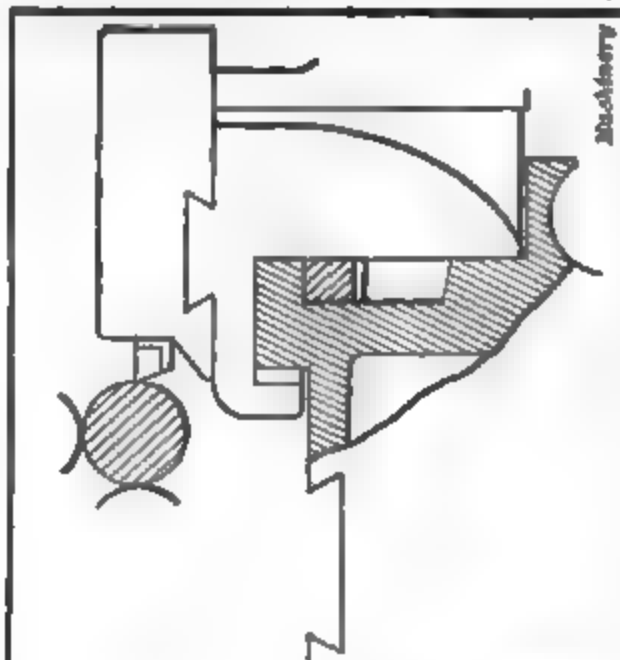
The Fitchburg Mach. Wks. Design of Lathe Bed
